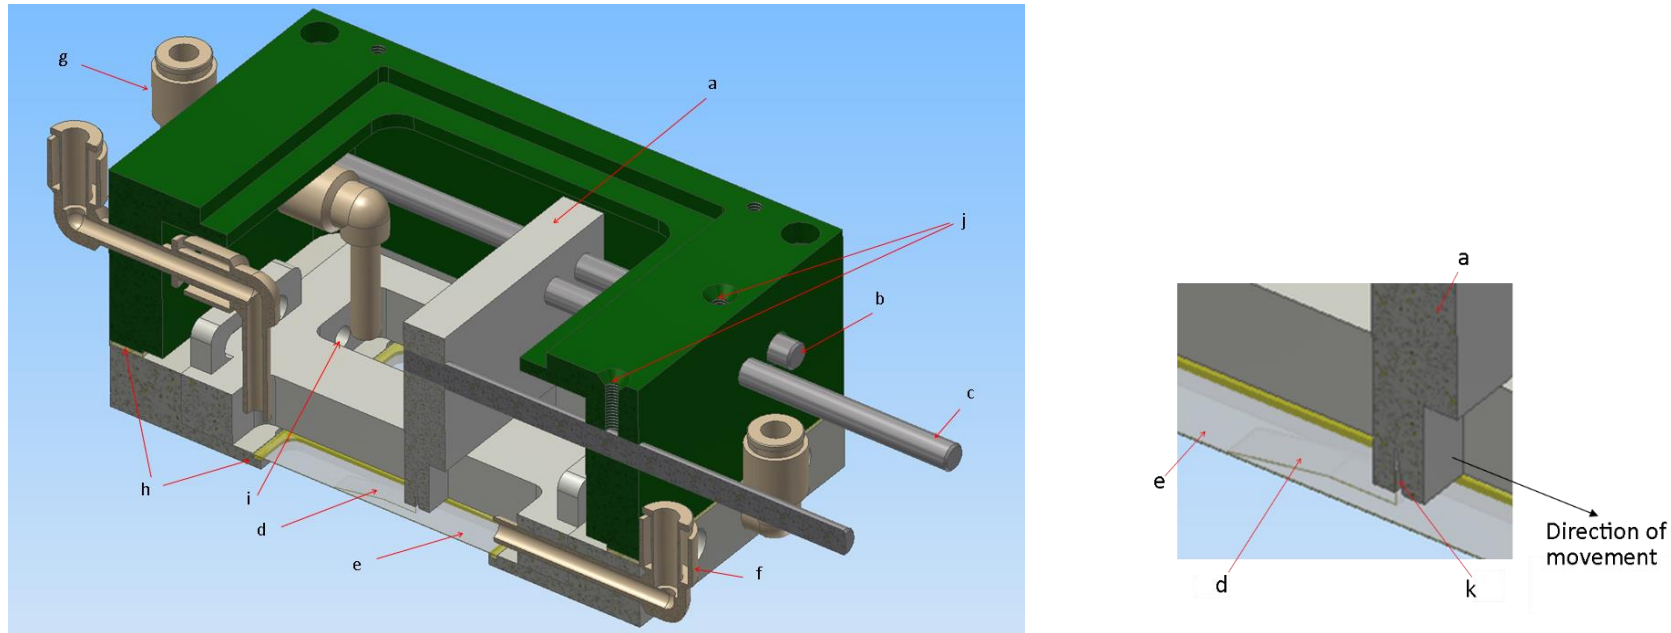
Sagittal view of 3 sectioned bioreactor (assembled)
